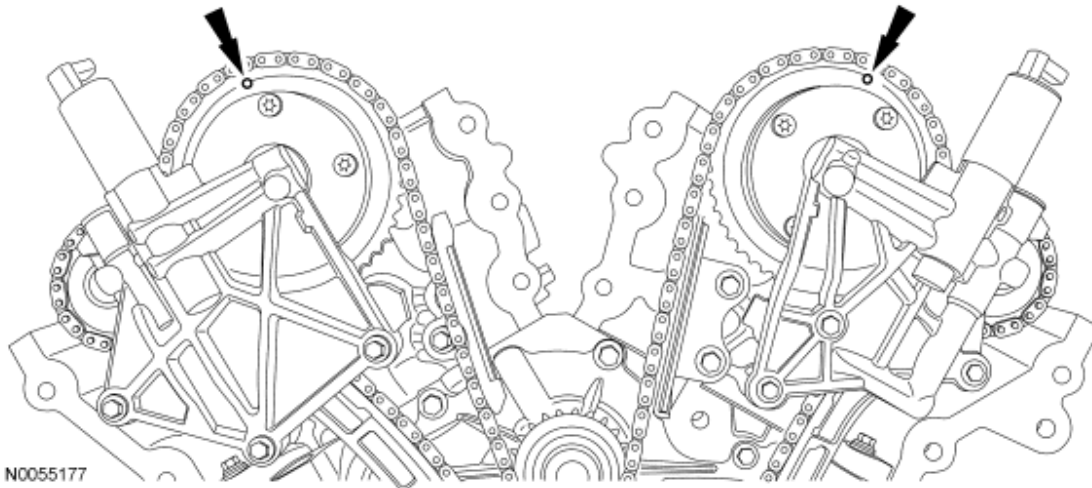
Aligning Timing Marks On Variable Camshaft Timing (VCT) Assemblies
